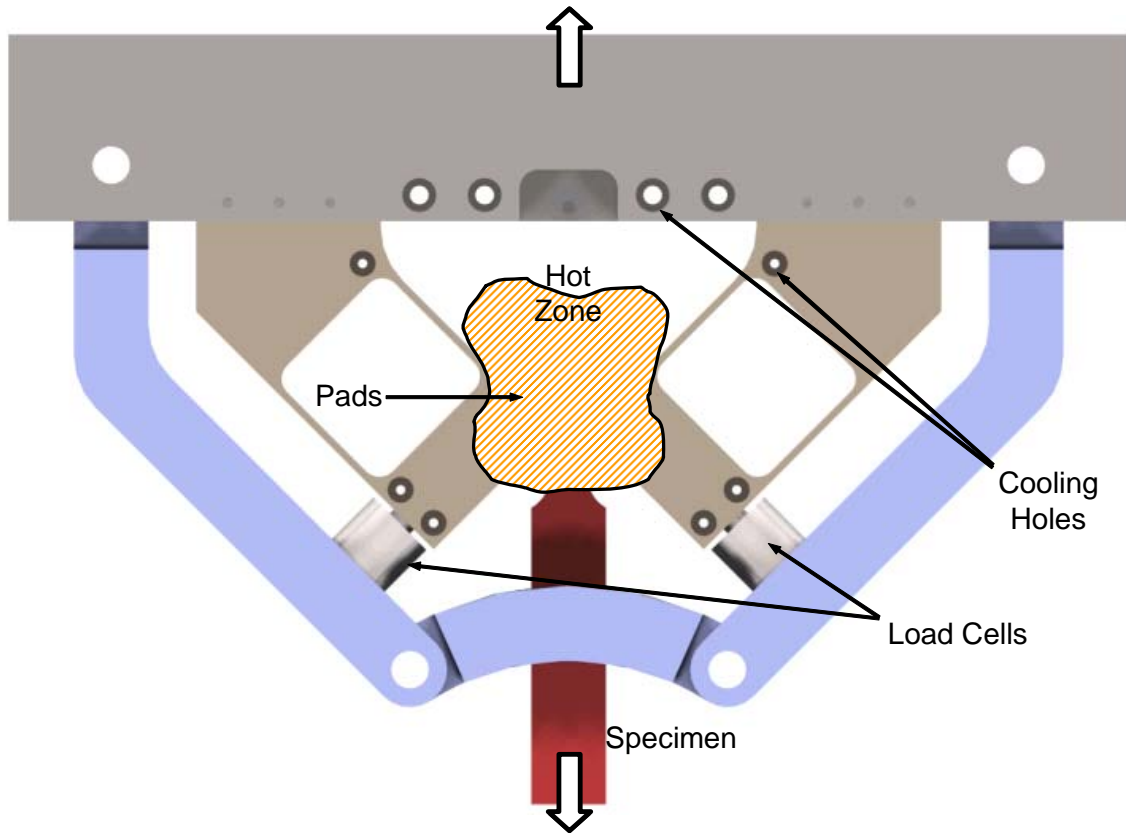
Drawing of the elevated temperature dovetail fretting fatigue fixture
